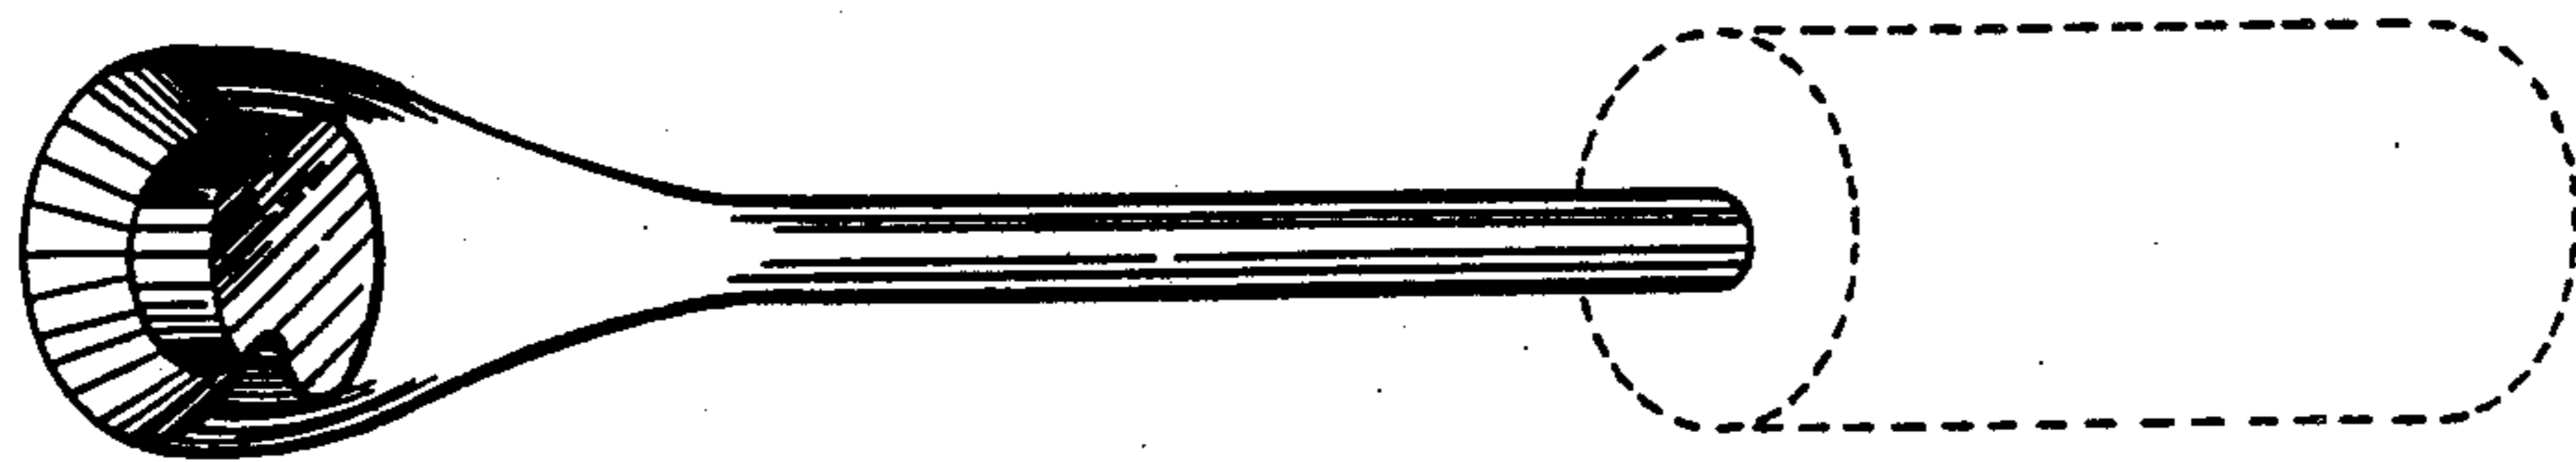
is a perspective view of a tool for inserting and removing a terminal lug cap showing my design, the broken lines being shown therein for illustrative purposes only.
